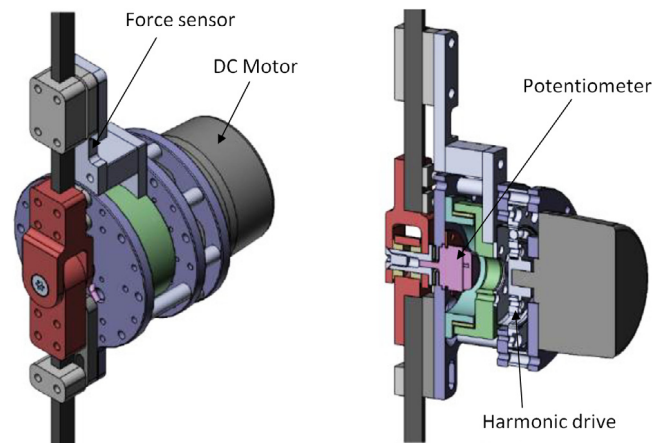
Schematic drawing of joint assembly of CPWalker.
